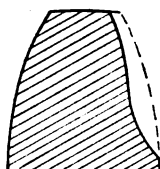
Showing how wear changes the involute tooth outline to a cycloidal outline
